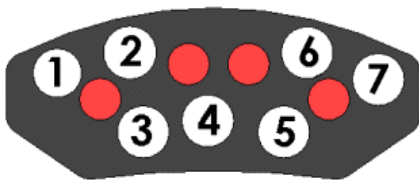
Template showing the backing plate through holes (red) and the measurement positions 1 through 7 for sample HP-1.
